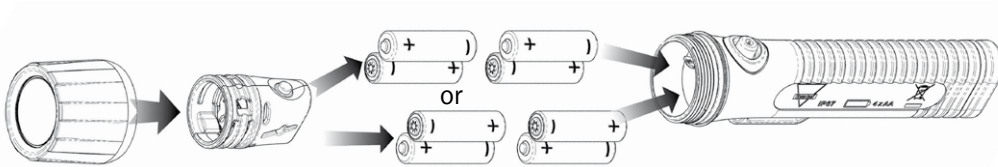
Exploded drawing HL 10 EX Type 4920... with batteries
